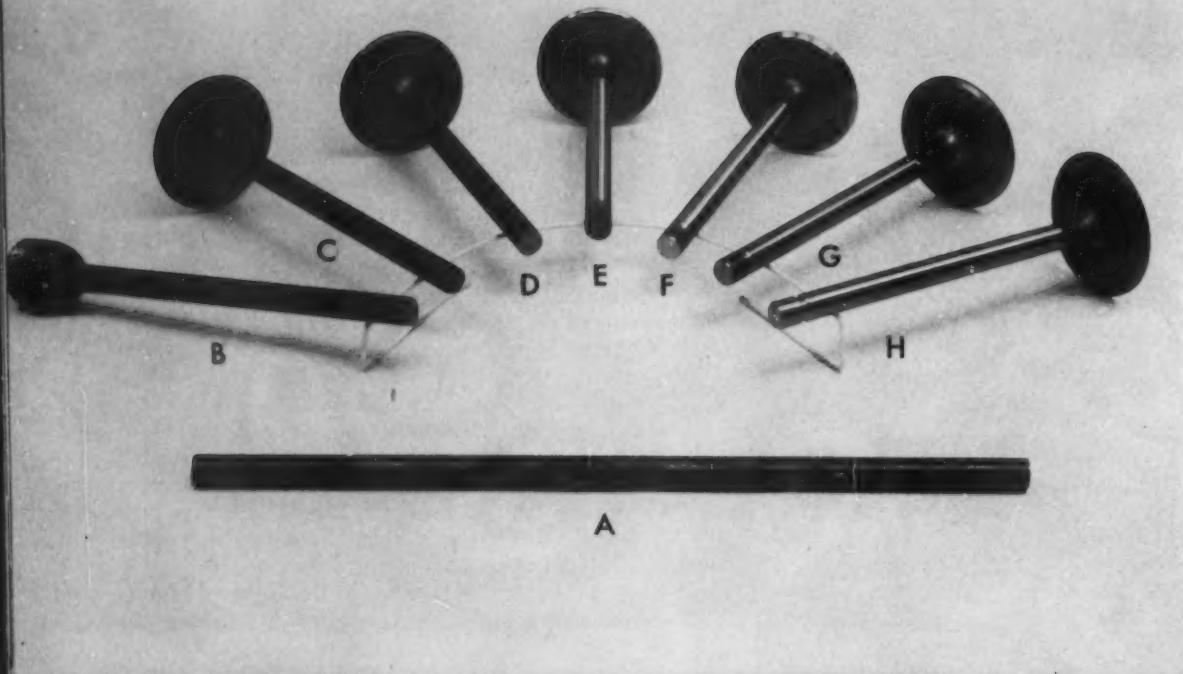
Major operations performed on intake valves: (A) sheared blank; (B) metal gathered at one end; (C) hot-forged head; (D) machined head and broached foot; (E) ground stem and hardened foot; (F) ground groove, valve face, and foot end; (G) aluminized valve face; and (H) completed valve.
